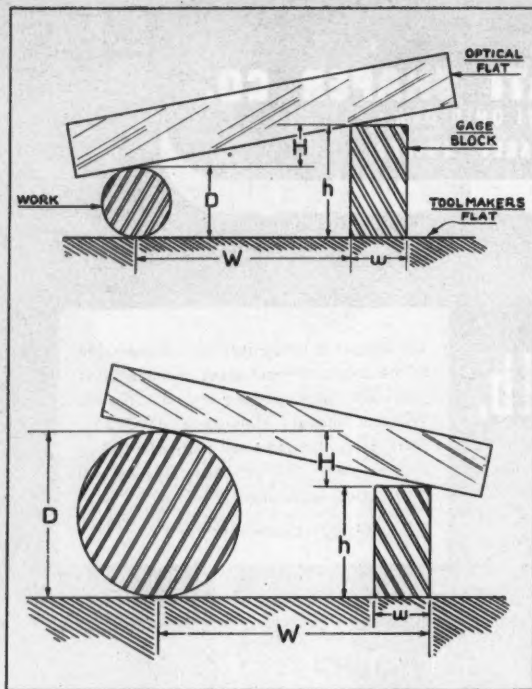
General Formula for Measuring Dimensions with Optical Flat and Gage Blocks.
